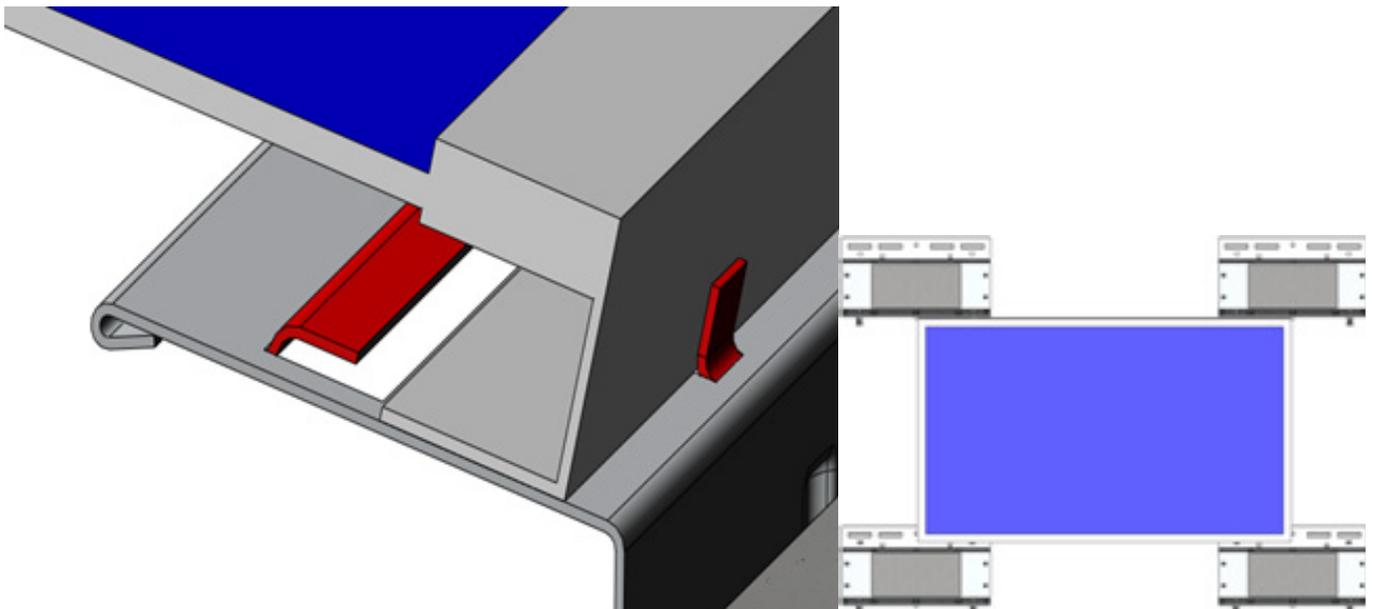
Detail view to describe the STEP with overview of the panel installation at right.
